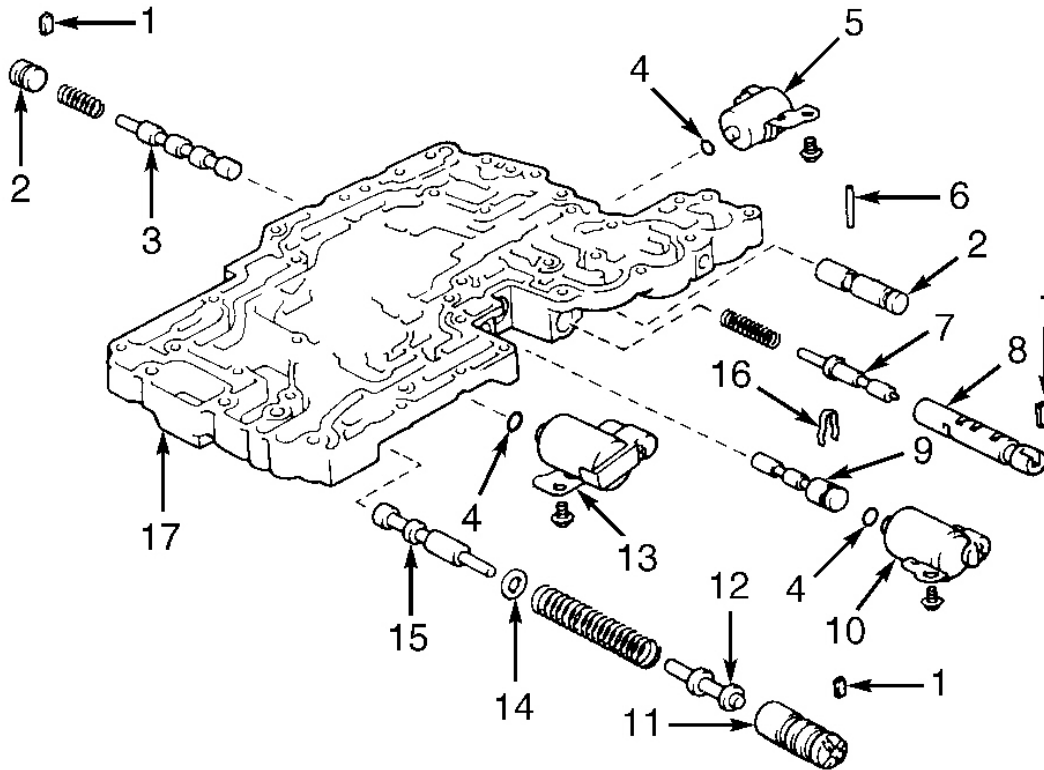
Identifying Lower Valve Body Seats, Clip & Pin Locations
